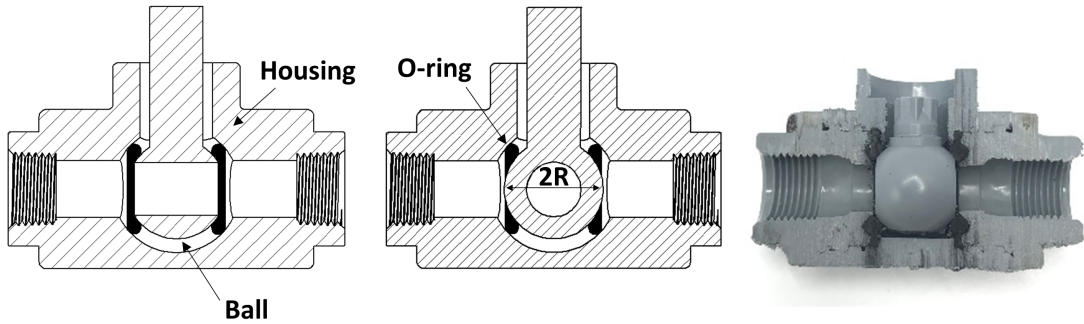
A cross-sectional view of a ball valve rendering in the open (left), closed (middle), and actual valve cut through the center (right).
